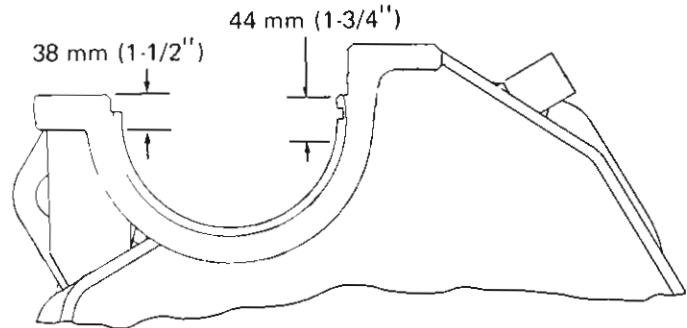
Frame Axle Bore "Unclean" Maximum Tolerance
